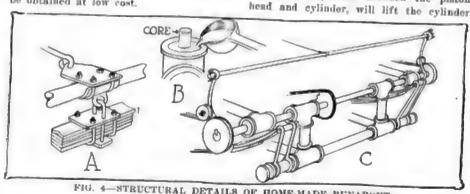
STRUCTURAL DETAILS OF HOME-MADE RUNABOUT
